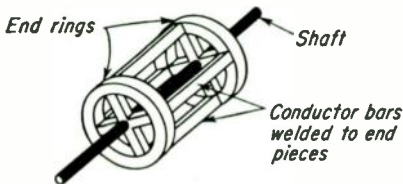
A basic form of rotor for a squirrel-cage motor.
